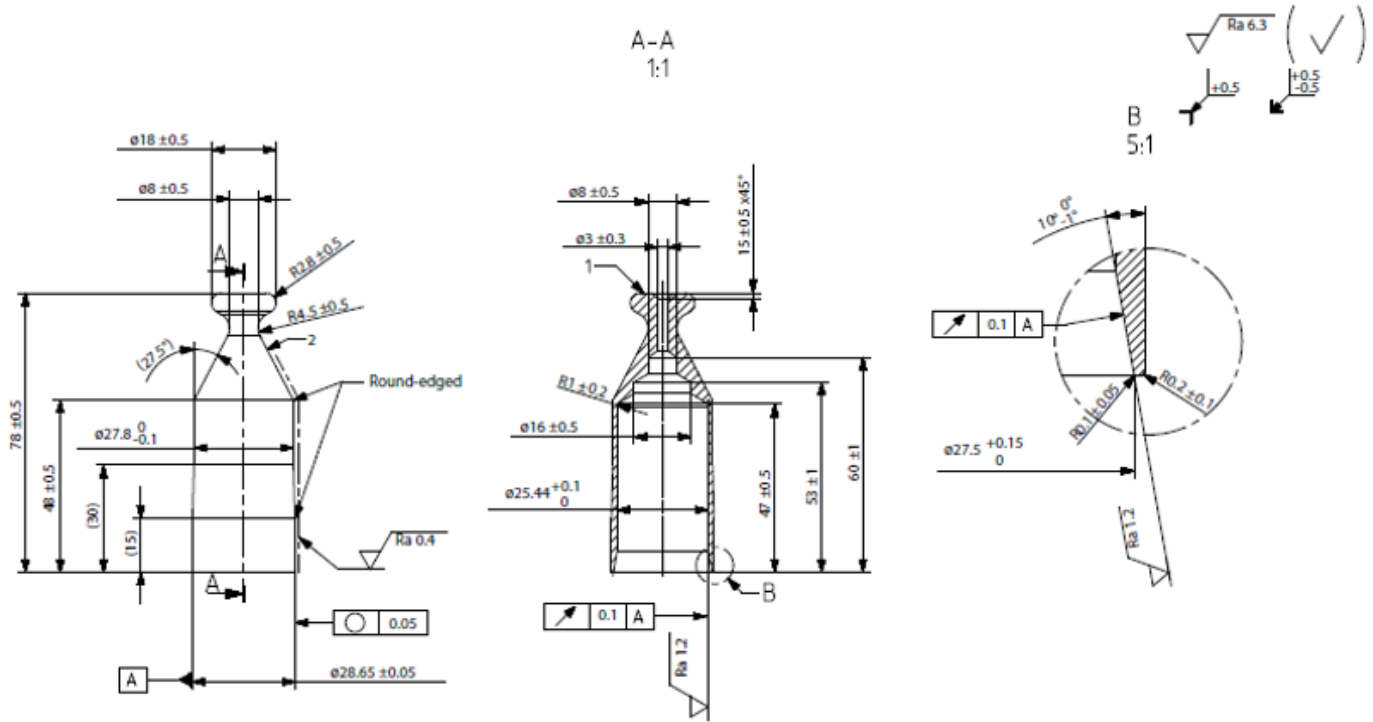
Torpedo for 25mm, 1 in., and 7/8 splined shaft
